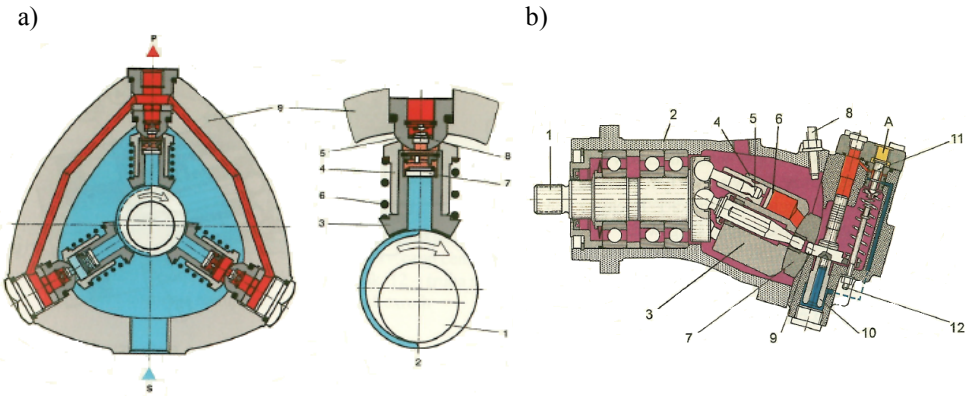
Diagram of a displacement multi-piston hydraulic pump: a) radial: 1 – drive shaft, 2 – eccentric, 3 – plunger, 4 – plunger cylinder, 5 – tip, 6 – spring, 7 – suction valve, 8 – discharge valve, body; b) axial: 1 – shaft, 2 – body, 3 – rotor, 4 – piston, 5 – plunger pusher, 6 – pin, 7 – tilting plate, 8 – stroke limiter, 9 – pin, 10 – plunger, 11 – slider, 12 – position controller [Bosch Rexrot]
